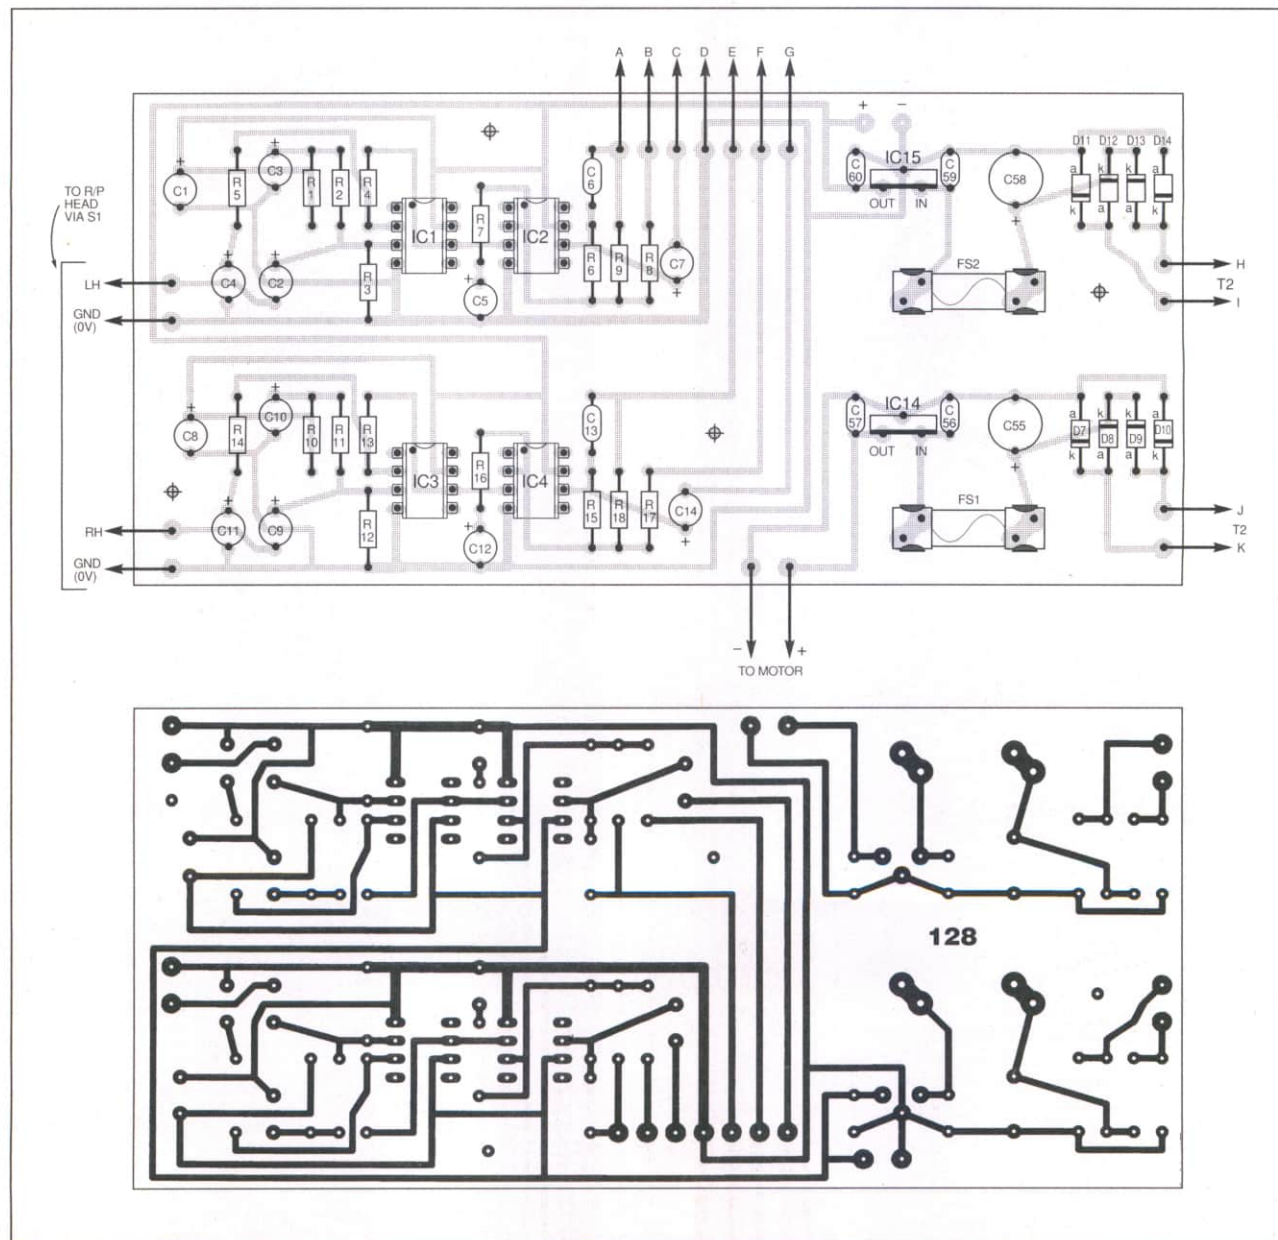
Playback/Power Supply printed circuit board component layout and full size copper foil master.
